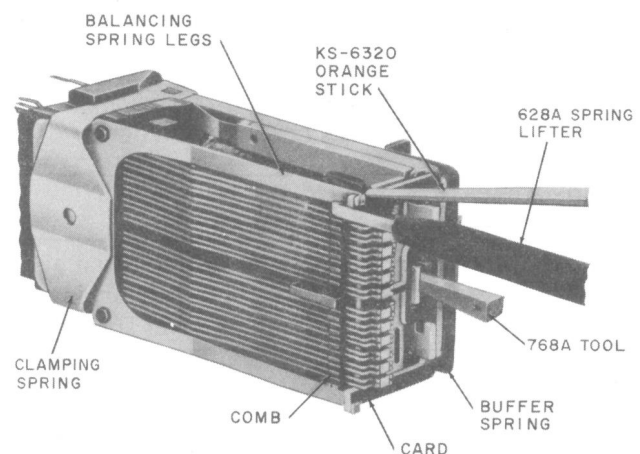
AL-Type Relay—Disengaging Balancing Spring From Card
